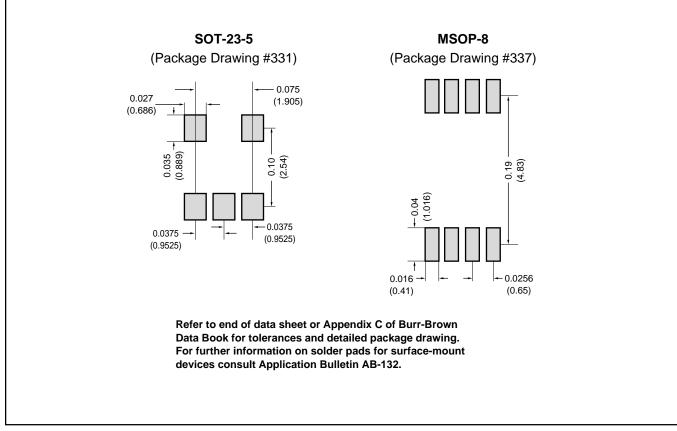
Recommended SOT-23-5 and MSOP-8 Solder Footprints.
